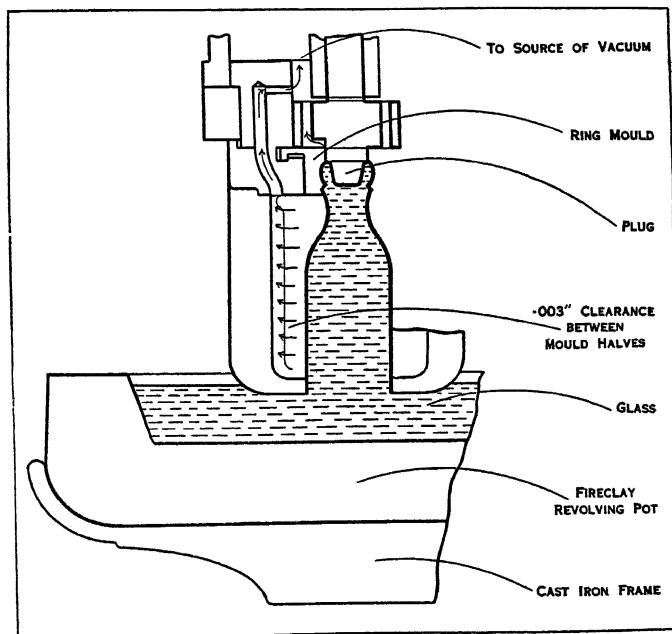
FILLING THE PARISON MOULD BY SUCTION (REDFERN MACHINE)
